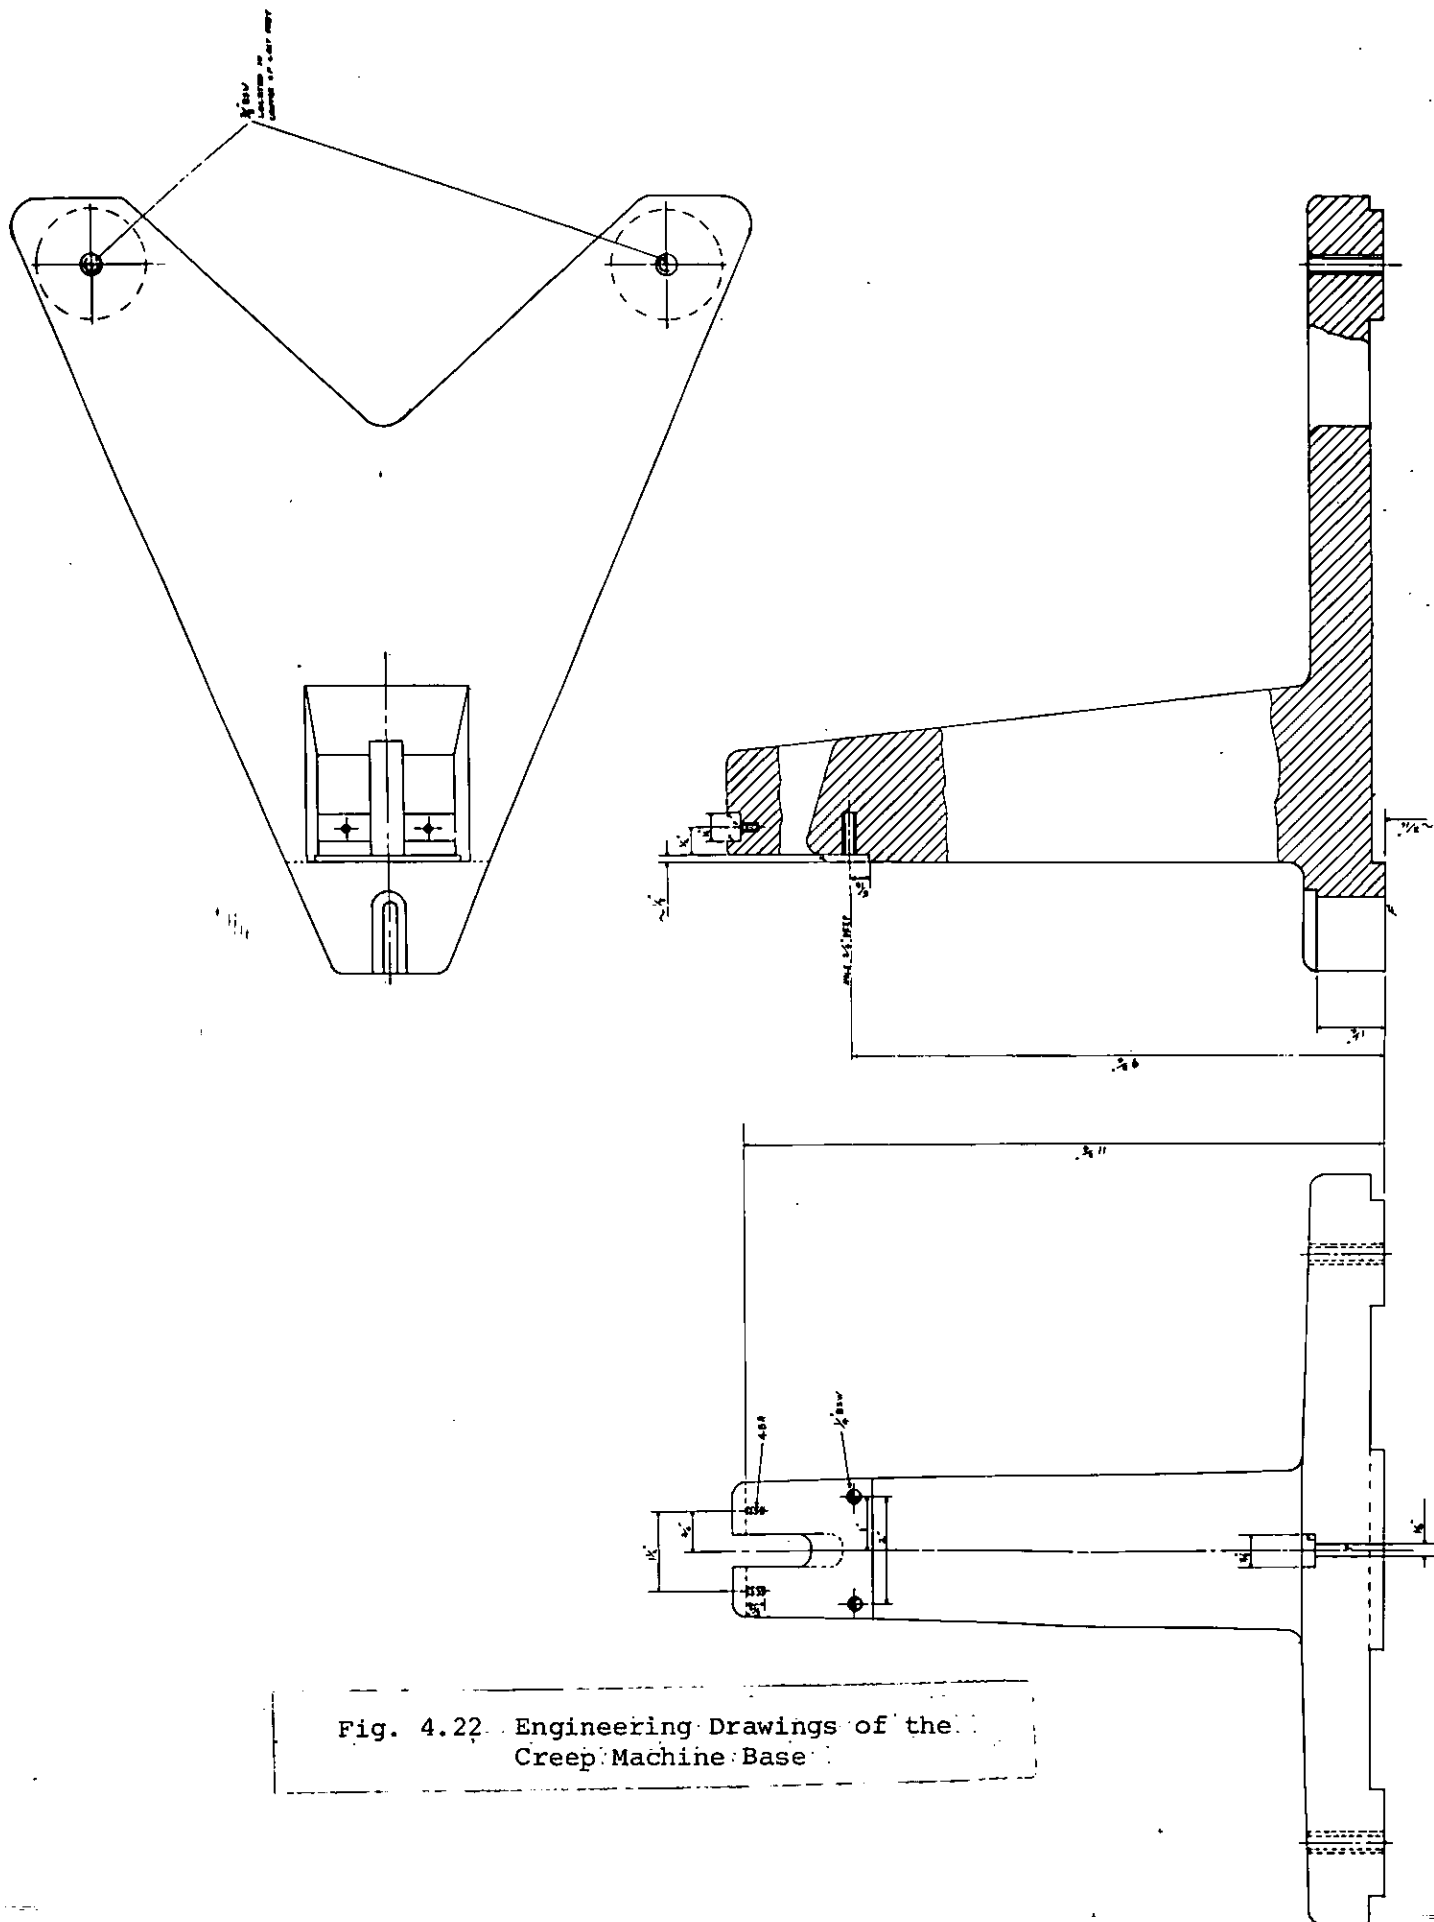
Engineering Drawings of the Creep Machine Base
